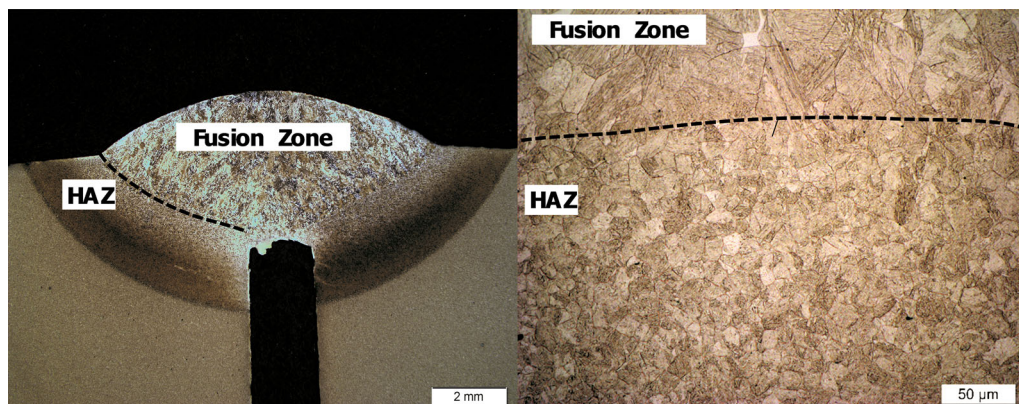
B91 weld showing the fusion and heat-affected zones (left), and a close-up of the fusion boundary (right), each with the approximate location of the fusion boundary. The hole below the weld nugget in the left image was a predrilled hole, which housed a thermocouple during welding.
